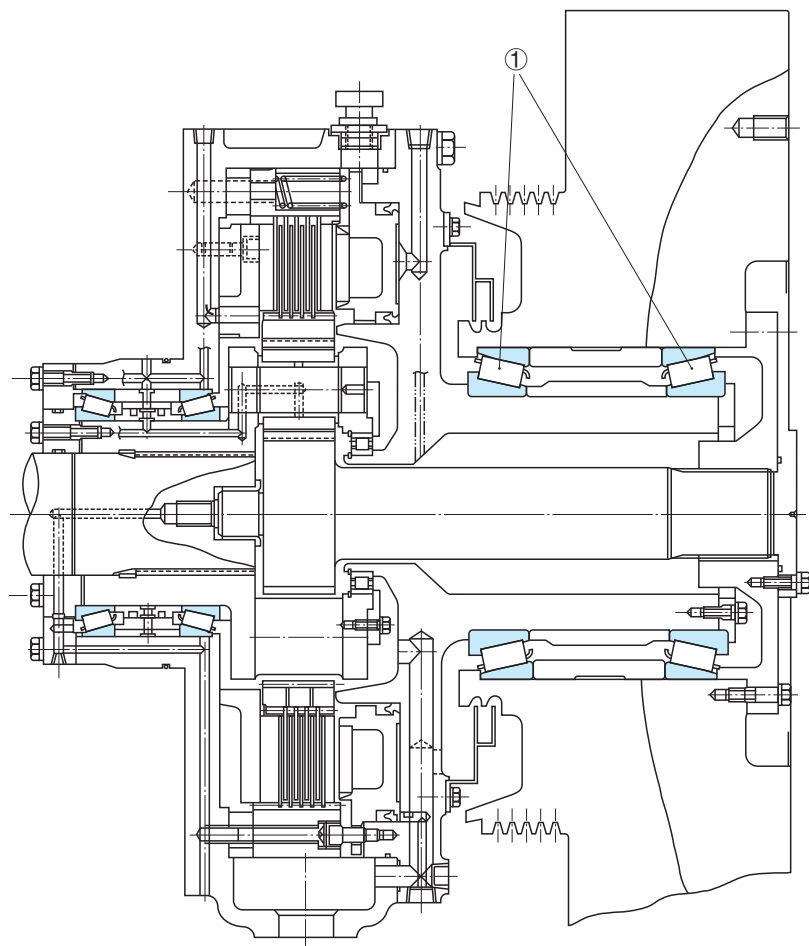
Flywheel and Clutch Assembly, Large-Size Press
